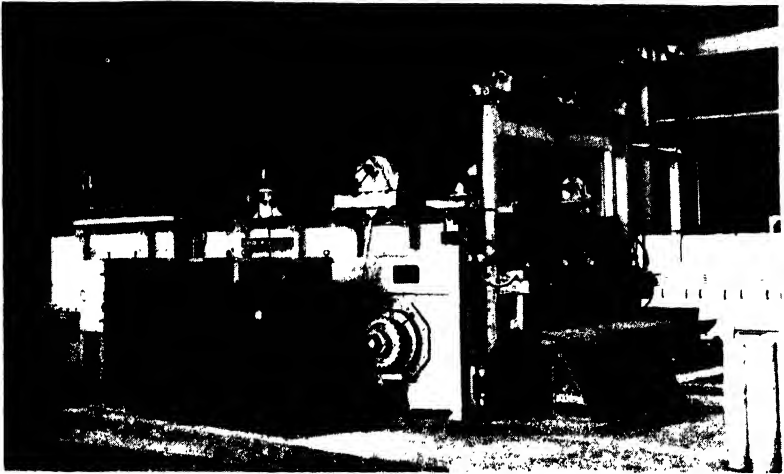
G.W.B. furnace for preheating billets of aluminium alloys.
